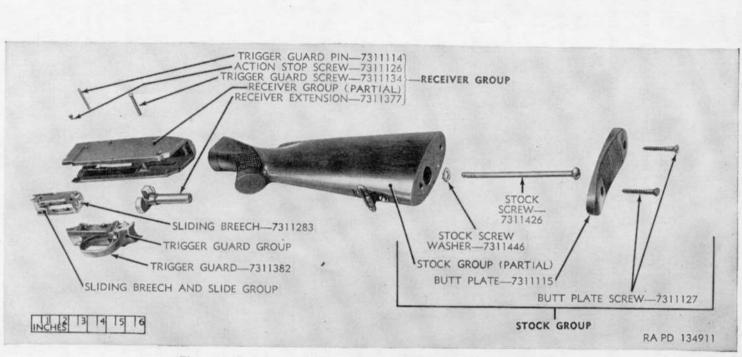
Breech end of Stevens shotgun M620A-partially exploded view.
